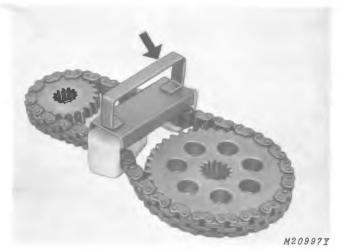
Positioning JDM-82 Chain Tensioner Tool
